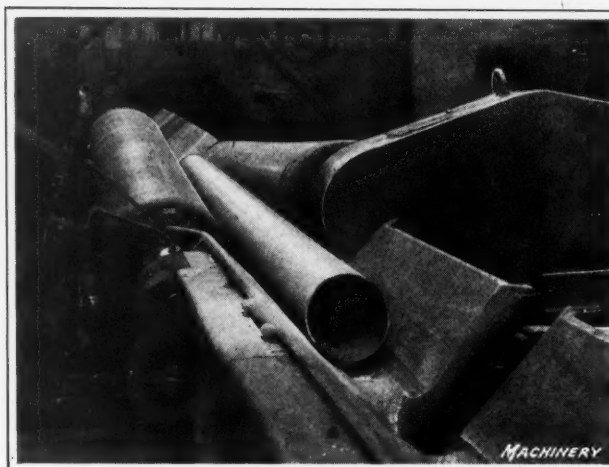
Cross-rolls which straighten Lap-welded Pipe and give it a True Circular Shape
